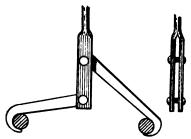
SHAPING AND WELDING ANGLE BARS.
